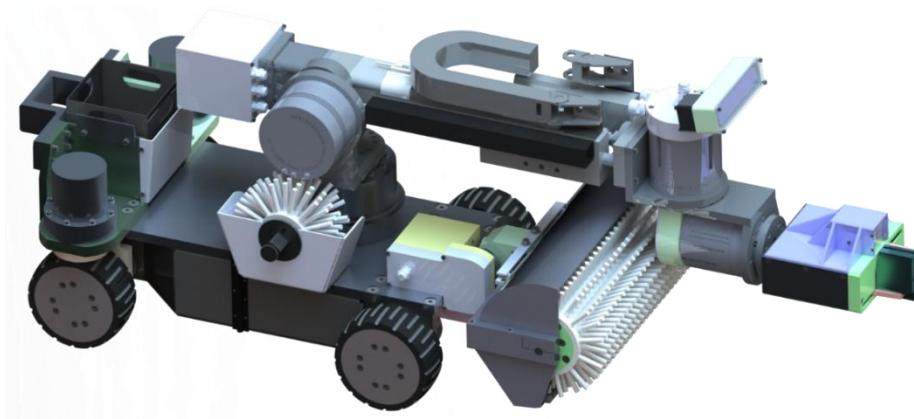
Mobile platform equipped with action attachments: robotic arm, front brush, removable container
